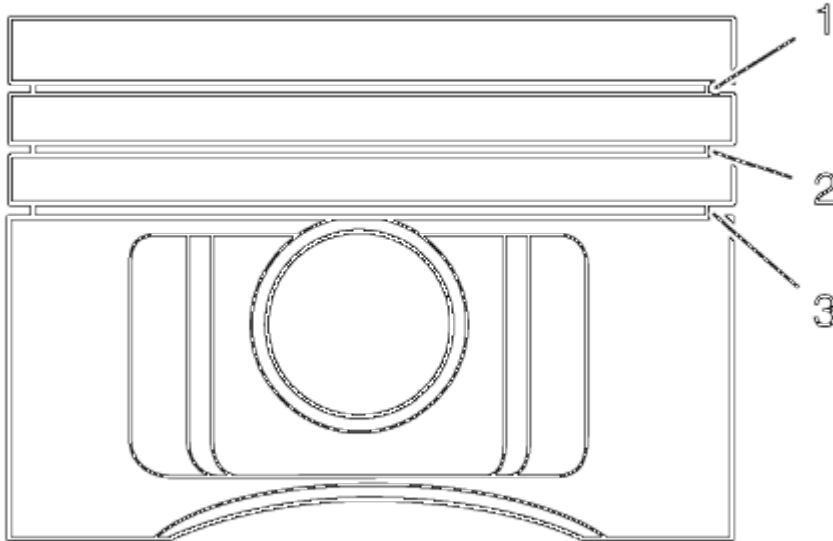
Rectangular Compression Ring, Tapered Compression Ring And Oil Scraper Ring
